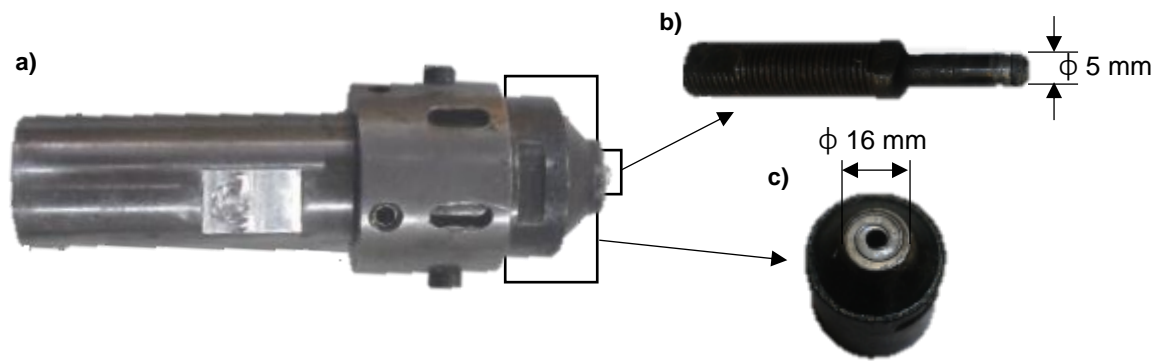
FSW tool components: a) tool body, b) tool pin and c) tool shoulder.
